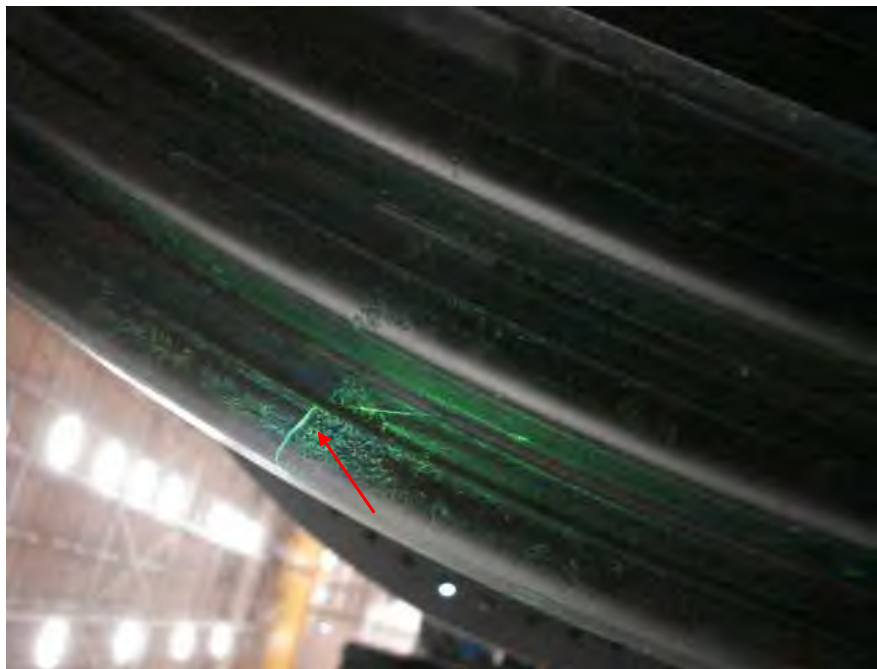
Close-up blacklight photograph of low pressure turbine "A" generator end L-2 stage disk on inlet side of the blade dovetail showing indication (arrow).
